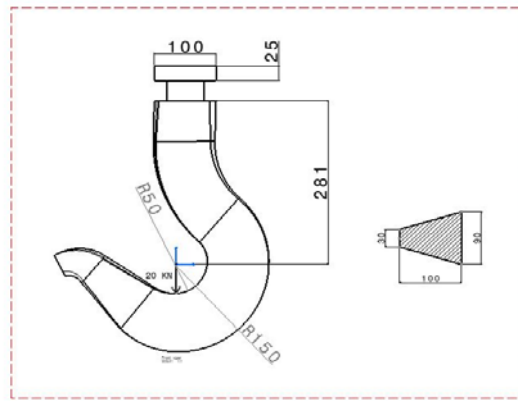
Design of Crane Hook with Trapezoidal C.S.A
